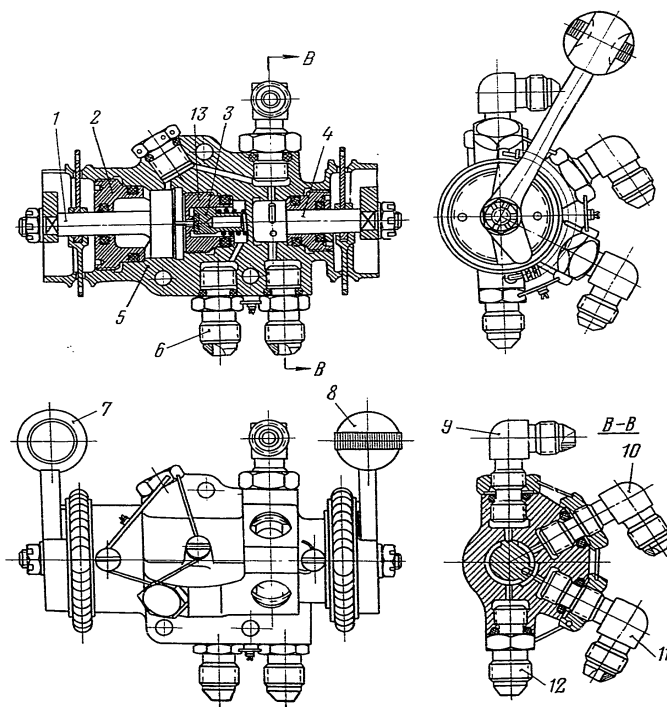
PILOT'S SEAT AND BACK-REST TILT CONTROL VALVE
